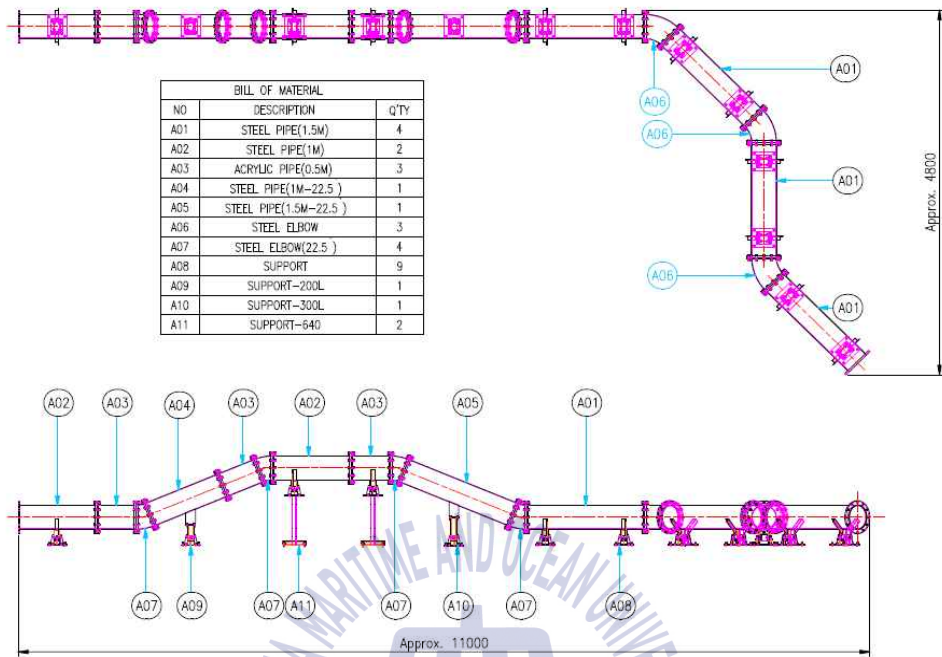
Dimension of test bench for the pipe cleaning robot
